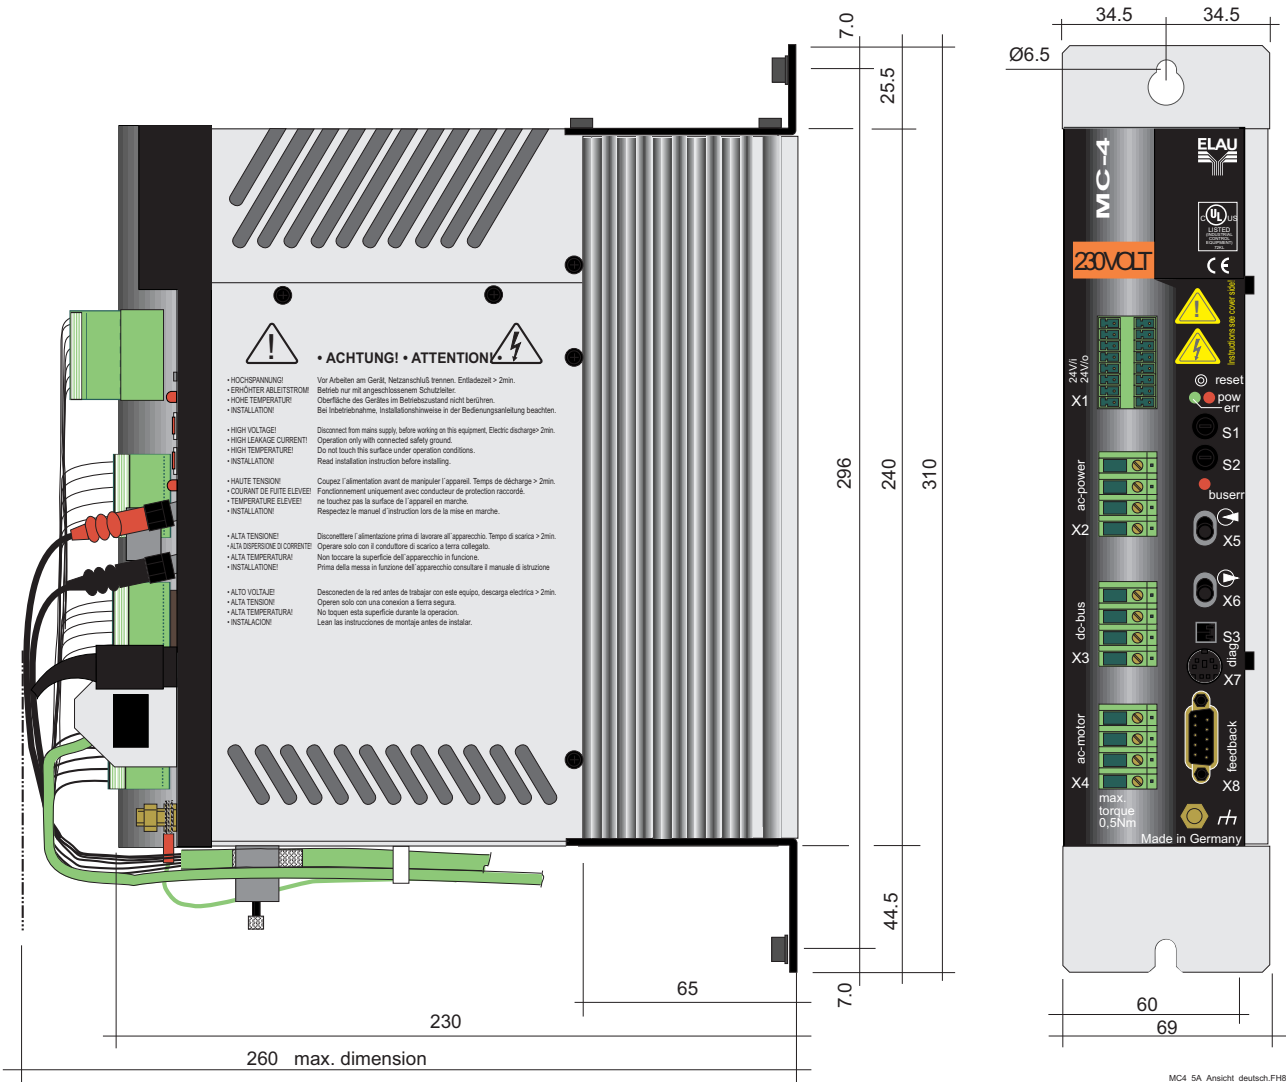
Dimensions of the PacDrive MC-4 / 5 A
